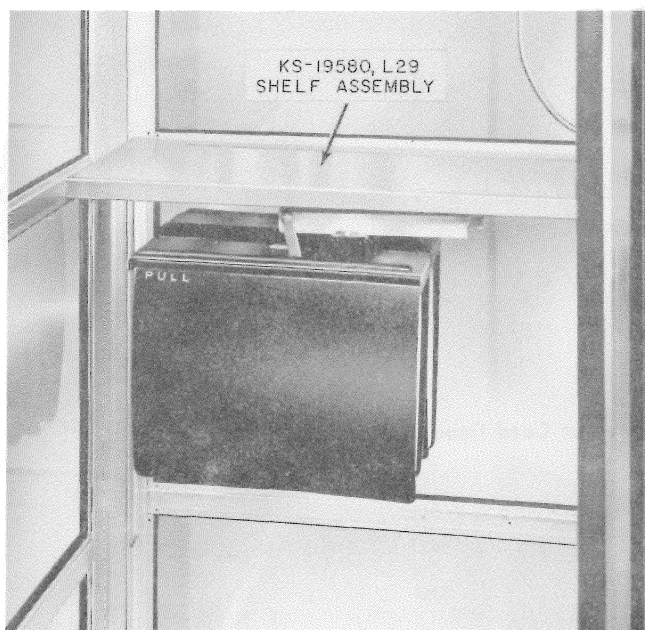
KS-19580, List 29 Shelf Assembly with KS-20030, List 2 Directory Hanger
